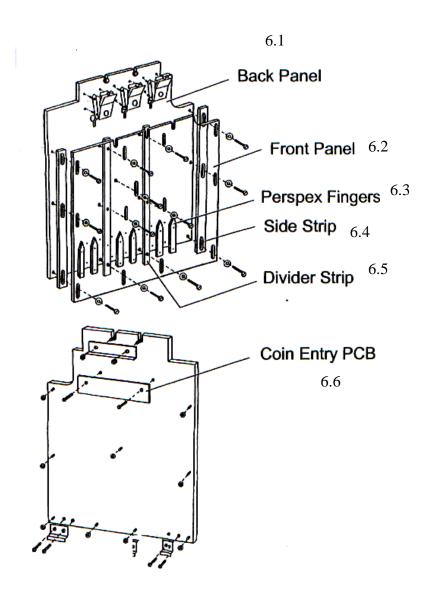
Pin Perspex Assembly (Non-Feature)
